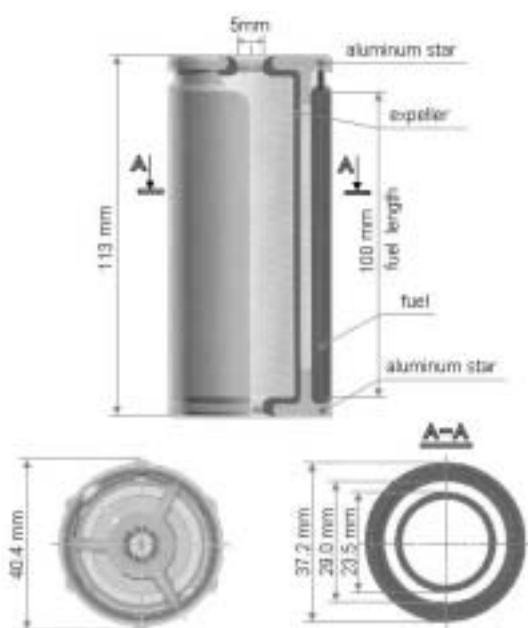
Design of TWR-S fuel assembly and placement of the TWR-S slugs into the TK-S16 containers
